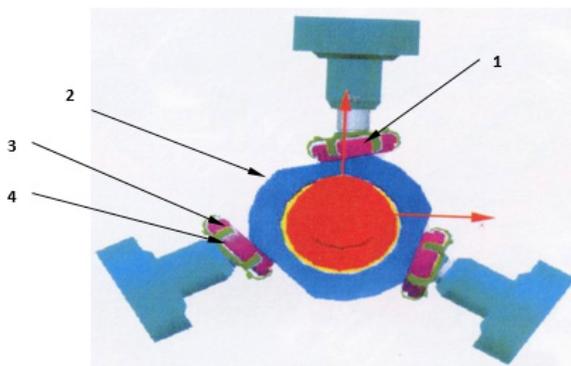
Cross section of the Bosch CP1 fuel pump in the operating position [3]:
